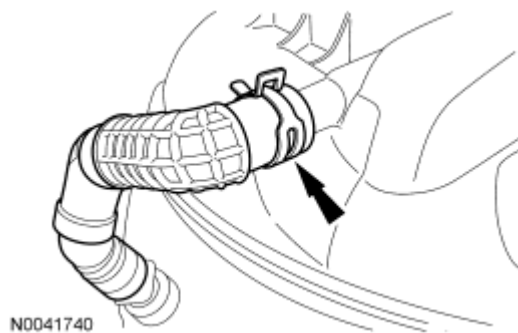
Locating Crankcase Vent Hose From Upper Intake Manifold
